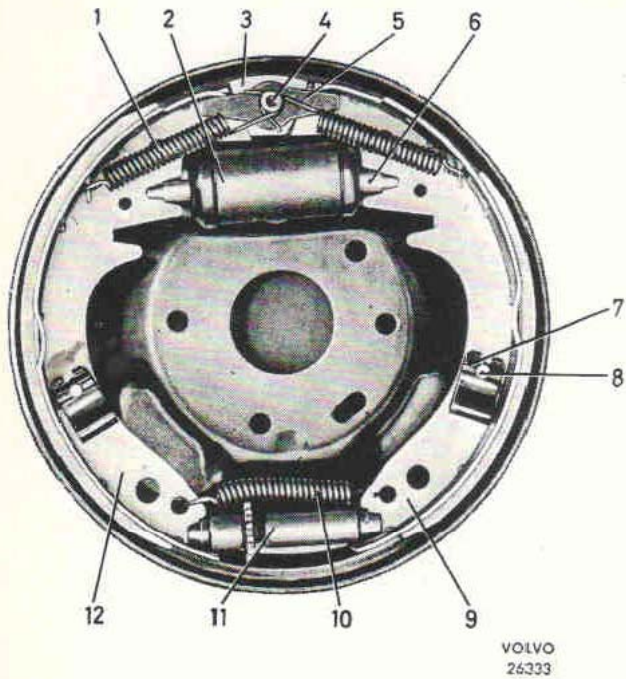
Wheel brake unit, late production, right-hand front wheel.
